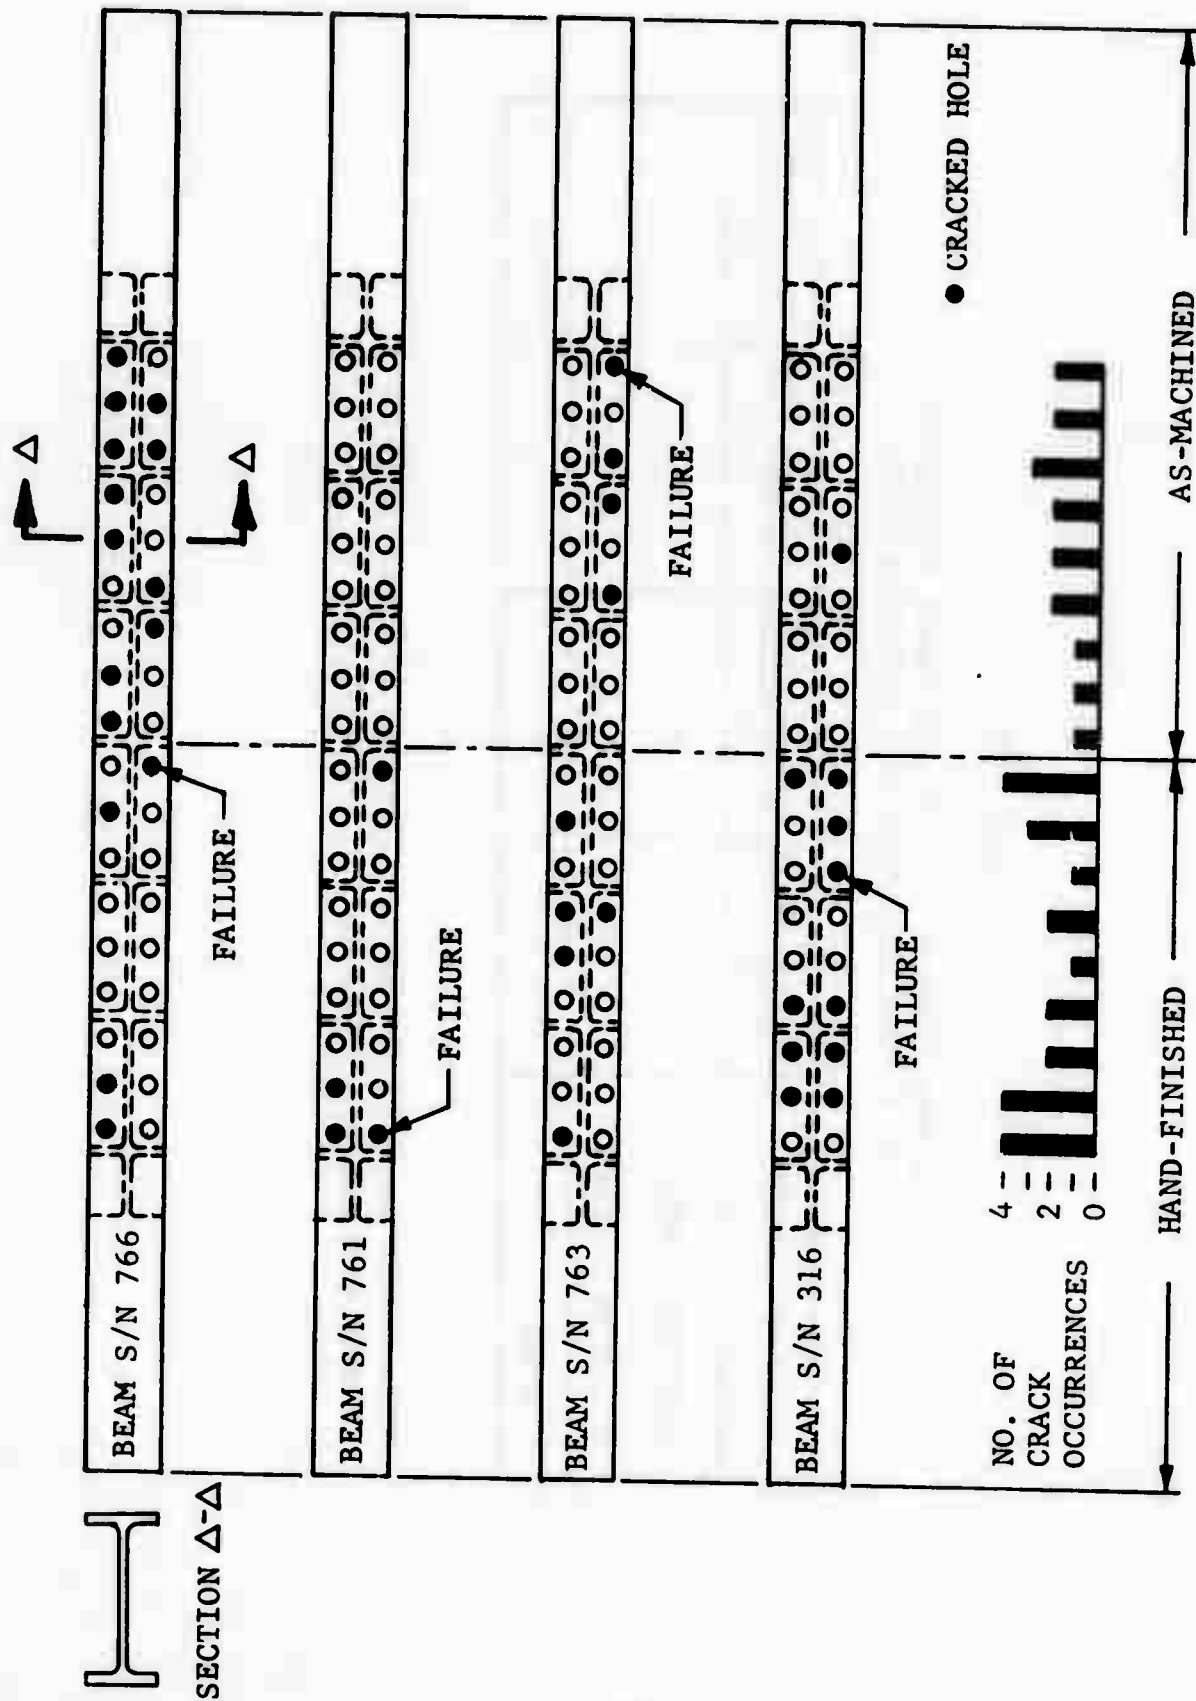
CRACK DISTRIBUTION FROM 1/4" FASTENER HOLES IN ALUMINUM I-BEAM SPECIMENS
